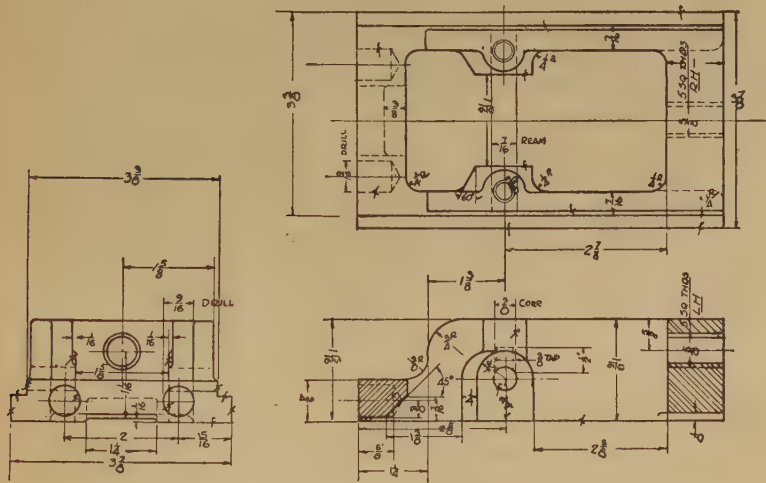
An incorrect drawing to be checked for errors (sliding block).
